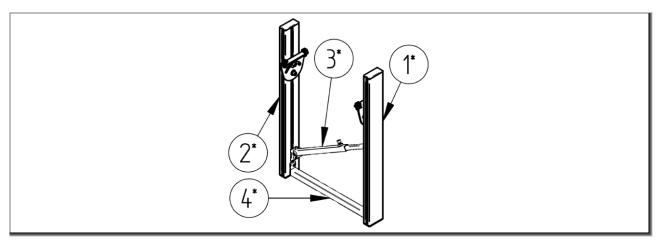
Parts list: Conveyor support AM 260 ZZ.982.0106.00
